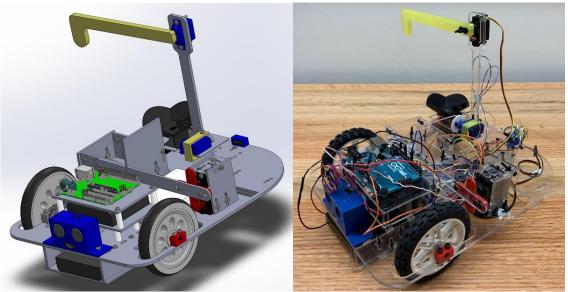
Back Right View of SolidWorks Model and Photograph of Milestone 3 robot
